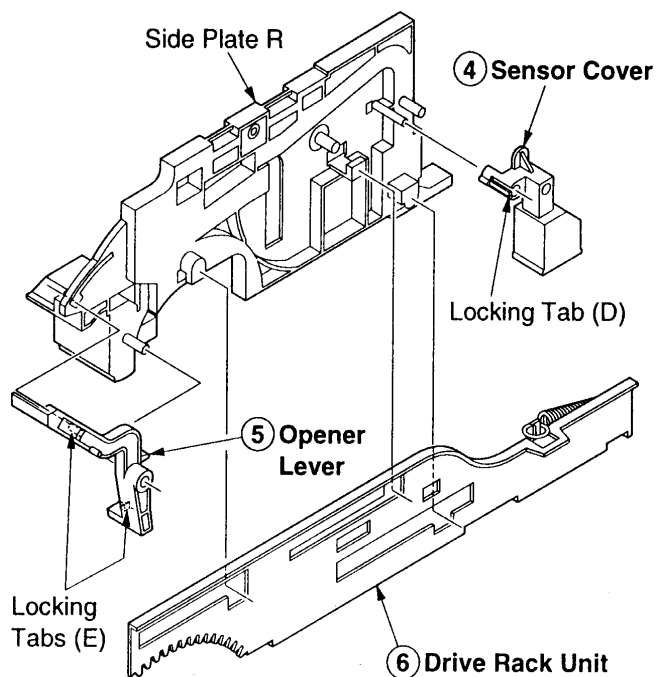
Sensor Cover/Opener Lever/Drive Rack Unit Removal
